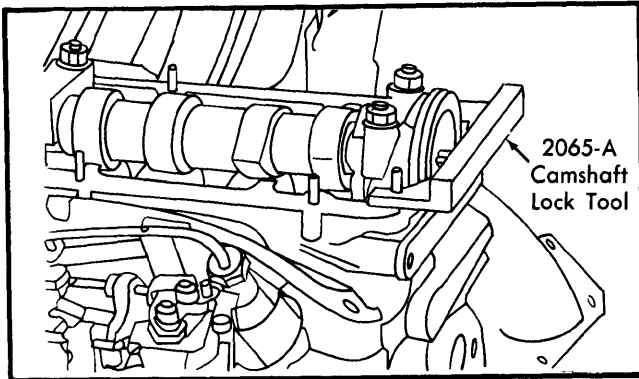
Camshaft Locking Tool Installation (Volkswagen Shown)
